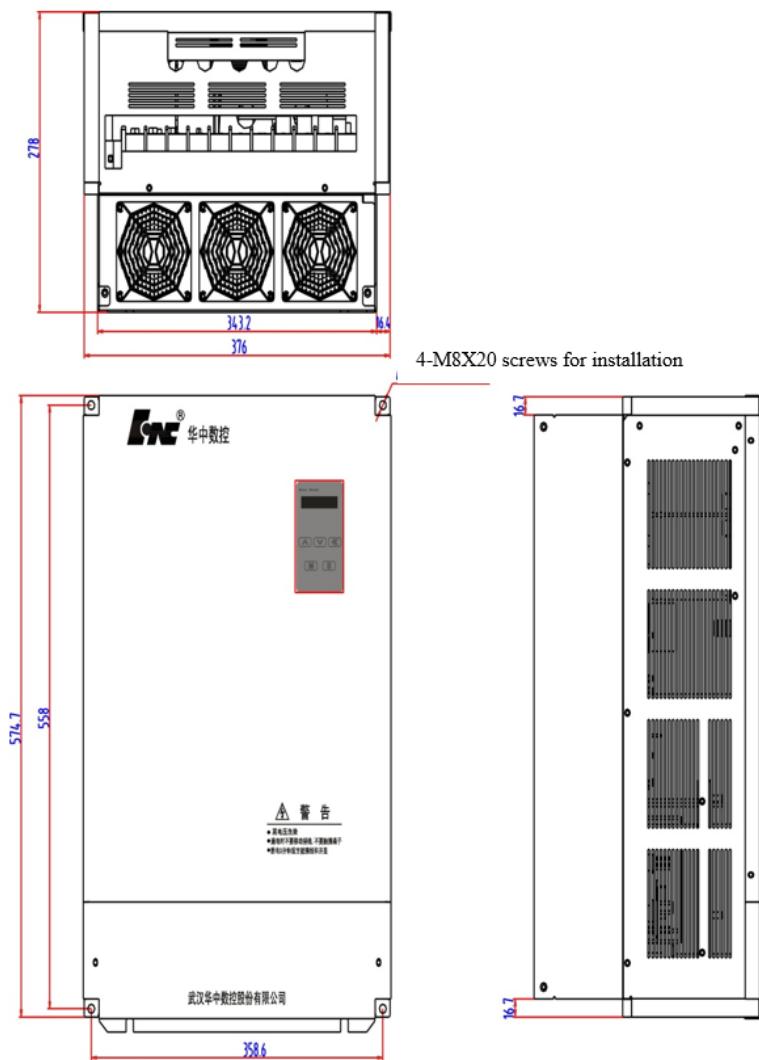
Dimensions of HSV-180US-200, 300, 450 Spindle Drivers
